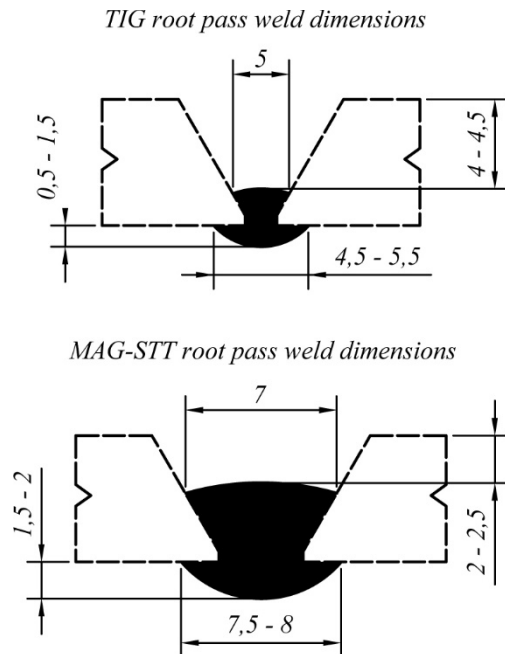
Root pass weld dimensions- TIG and MAG-STT process
